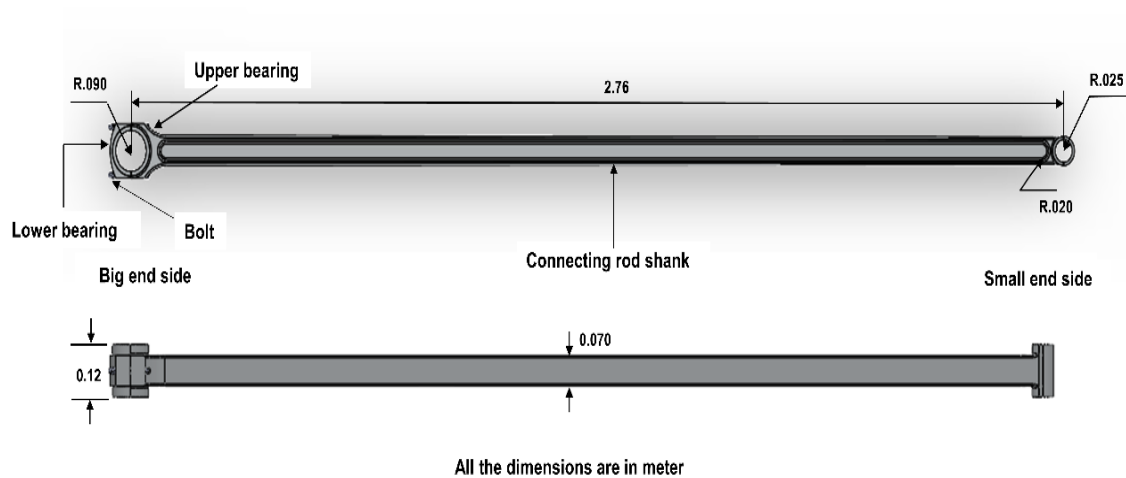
Drawing and SolidWorks designed connecting rod with specified dimensions.
